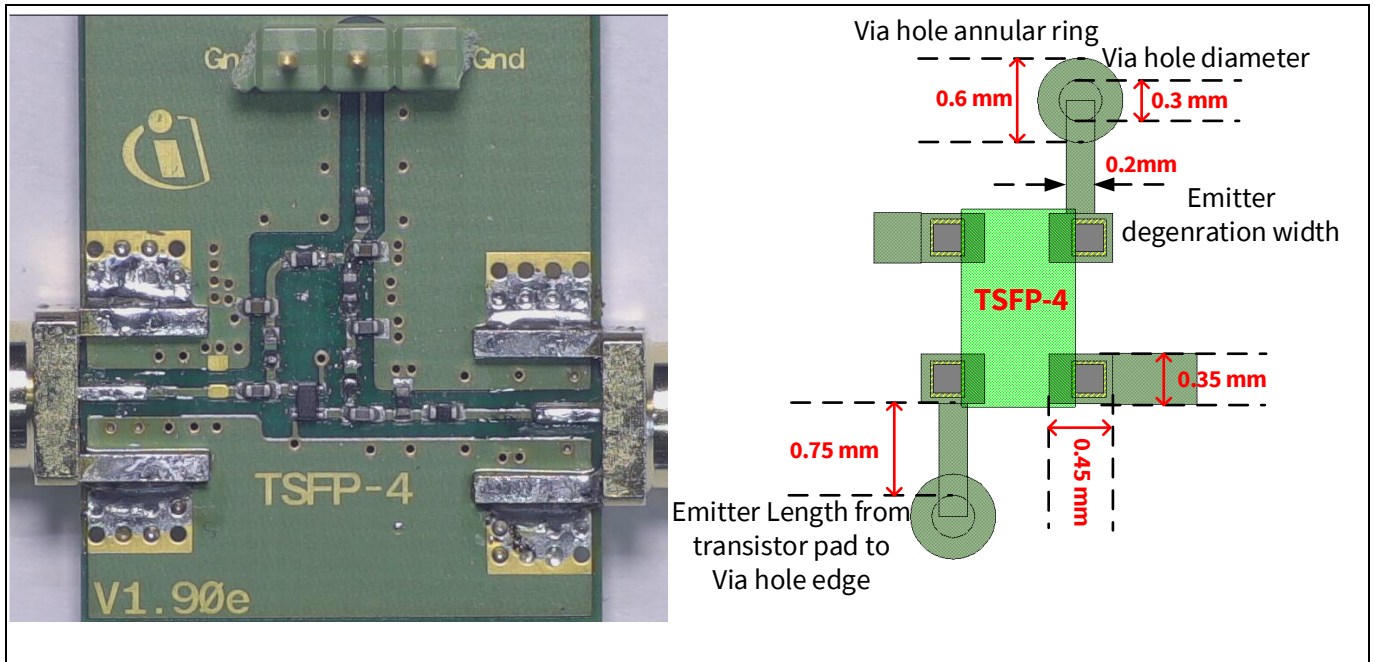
Photo of the evaluation board with PCB marking M100511 (left) and emitter degeneration details (right)
